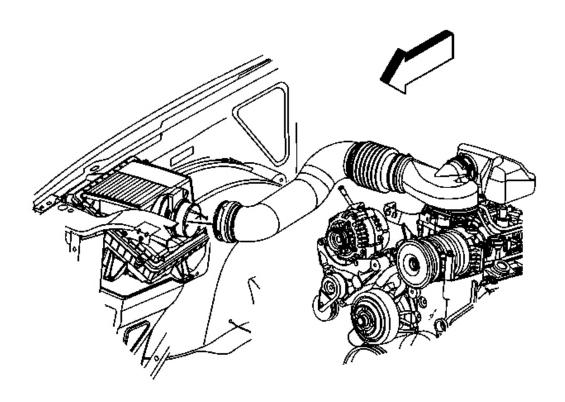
View Of Air Cleaner Outlet Duct Clamp Courtesy of GENERAL MOTORS CORP.
